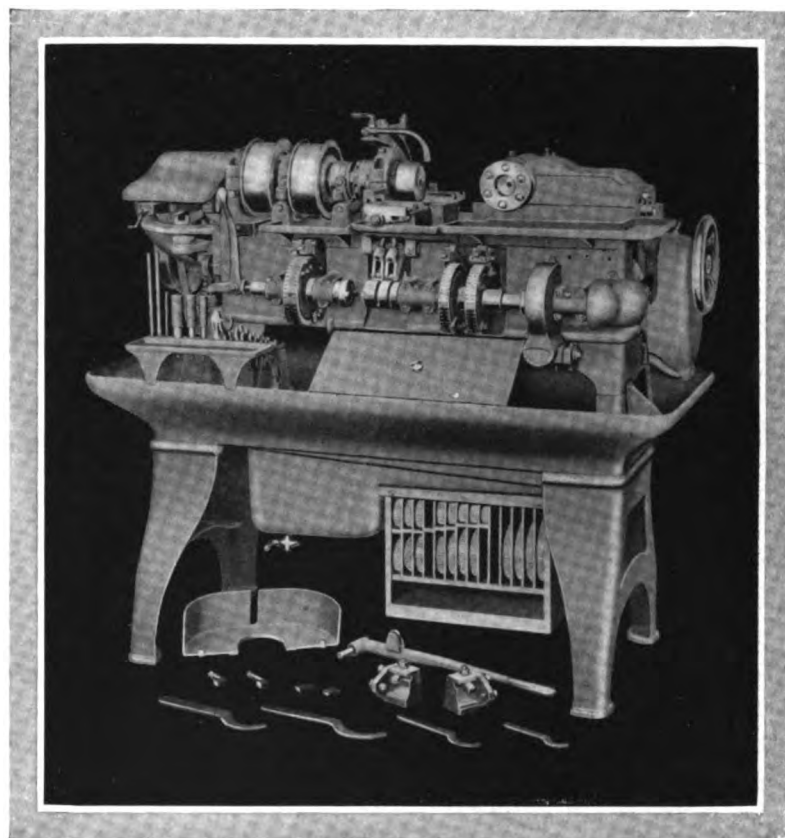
No. 2 Brown & Sharpe Spindle Drive Automatic Screw Machine
